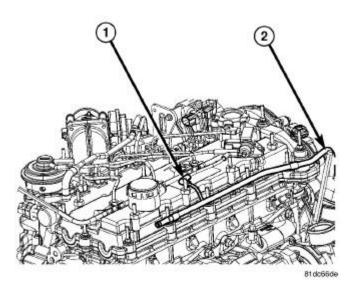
Vacuum Supply Tube Courtesy of CHRYSLER LLC
